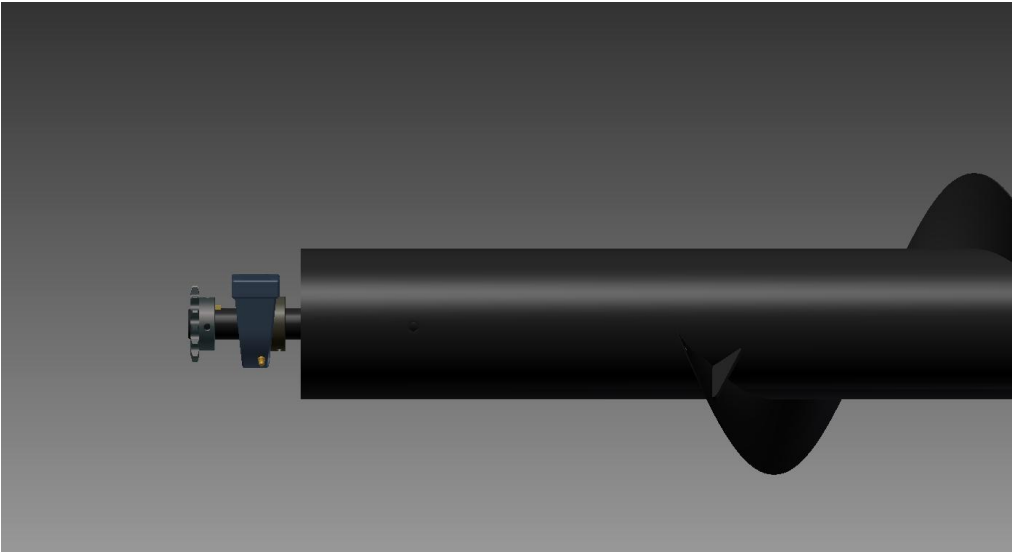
LH AUGER WITH BEARING, LOCK COLLAR, SPROCKET AND KEY STOCK.
